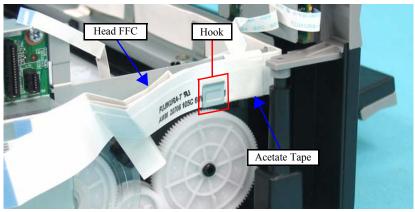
Removing Main Board Unit/Left Frame (1)
